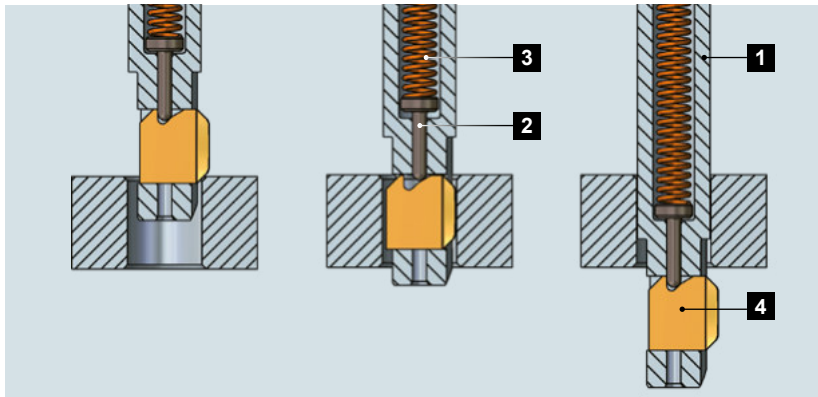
Unlike the smaller tool types SNAP2 up to 4 this tool has one tool body and 5 other components only.
